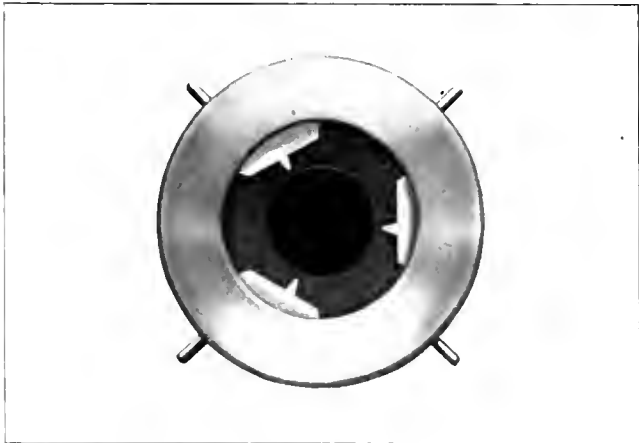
End View of Chuck for Holding Spur Gears when Grinding the Holes
